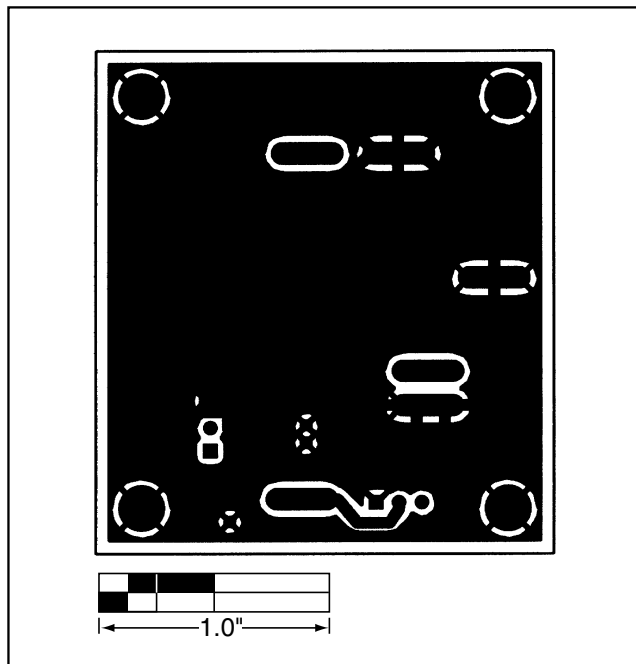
MAX1649 EV Kit PCB Layout—Solder Side
